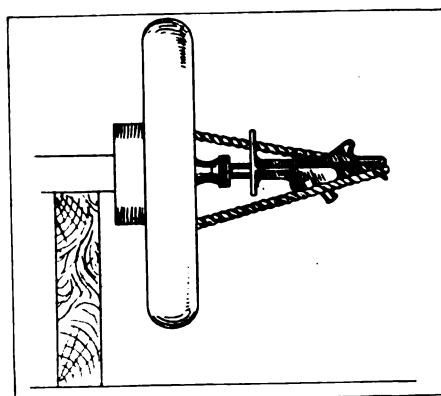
An Emergency Wheel Puller for Roadside Repairs, Consisting of a Jack, Metal Bar and Piece of Rope.
